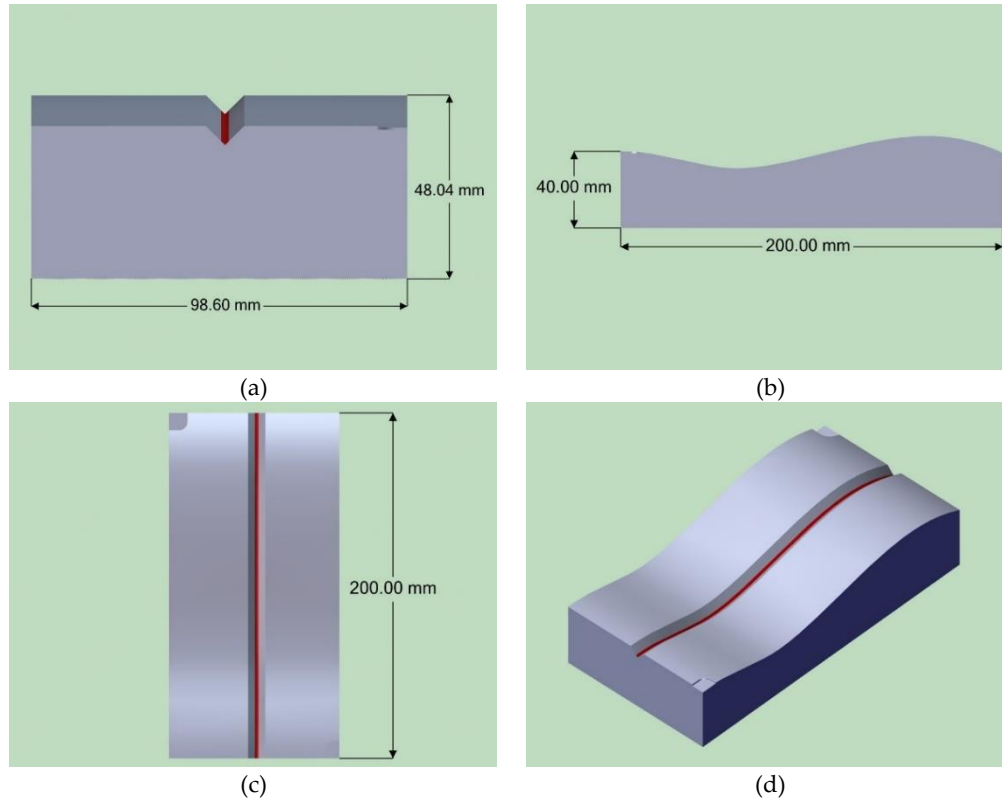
Test V-type butt sample model with three-dimensional welding trajectory, a) front view, b) side view, c) top view and d) Isometric view.
